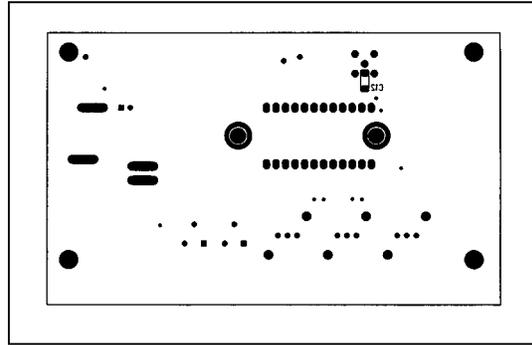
MAX445 EV Kit Component Placement Guide—Solder Side
